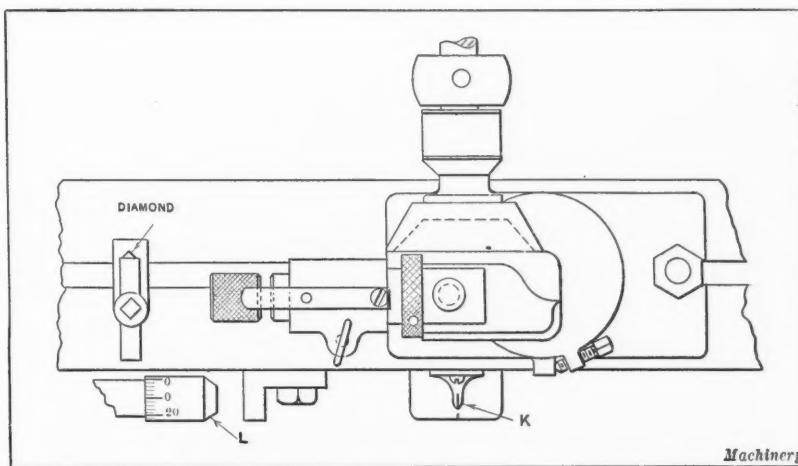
Plan View of Reamer-grinding Fixture shown in Fig. 1
